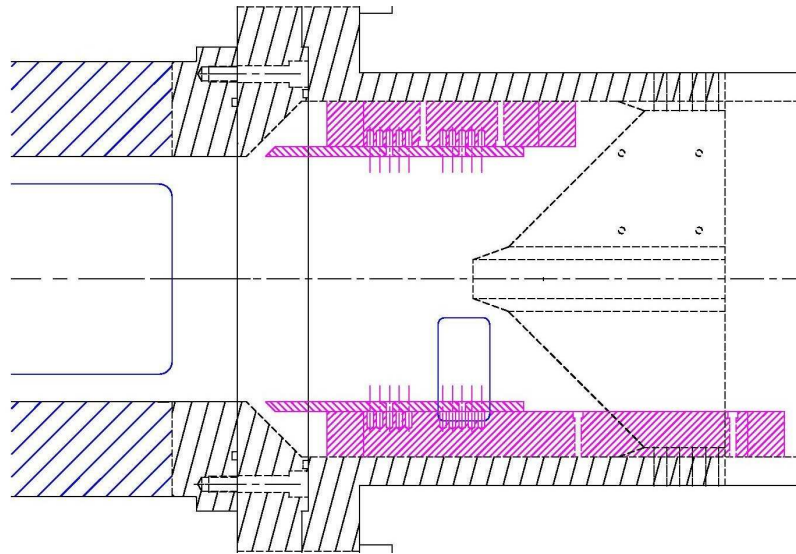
Sting-support section and diffuser section schematic. Dimensions in inches.
